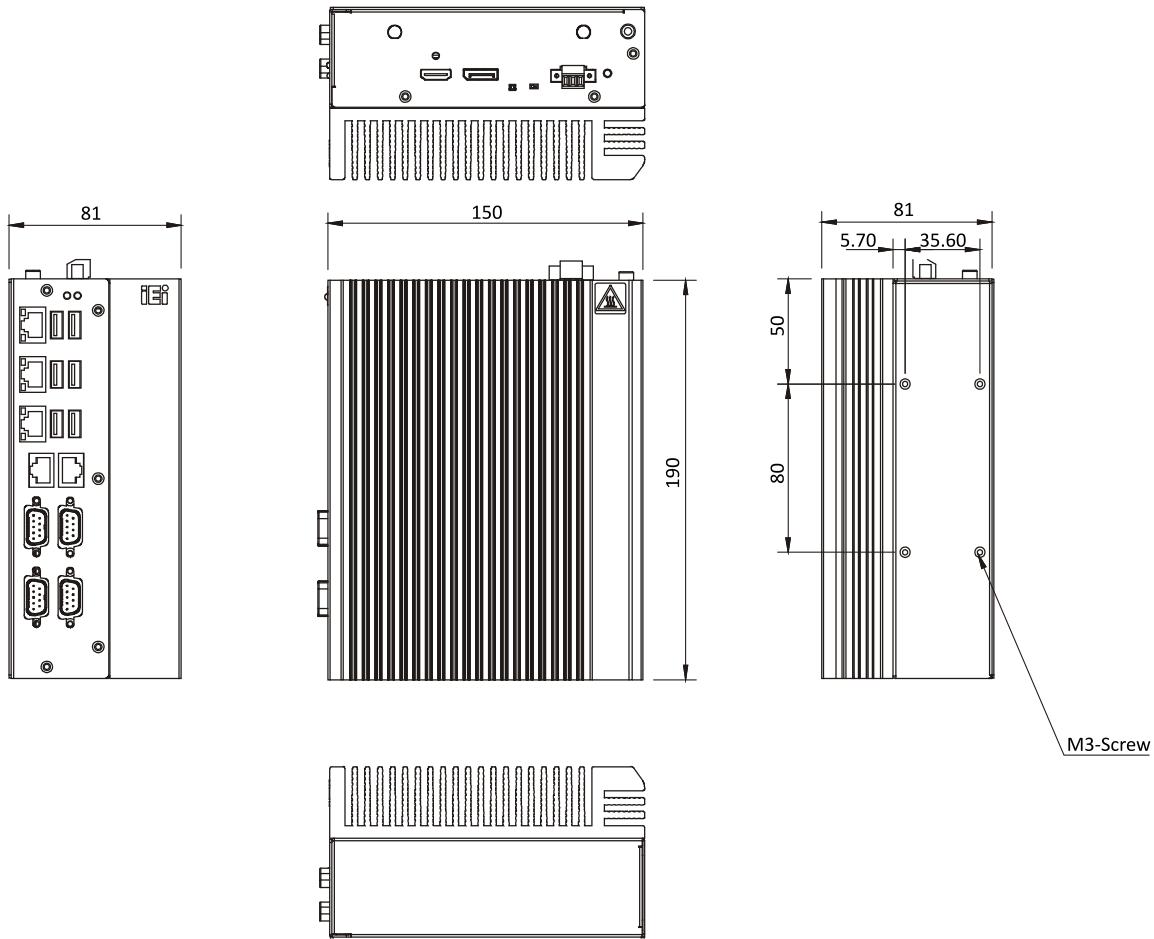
DRPC-230-ULT5-i5/8G/S & DRPC-230-ULT5-CE/8G/S Dimensions (mm)
